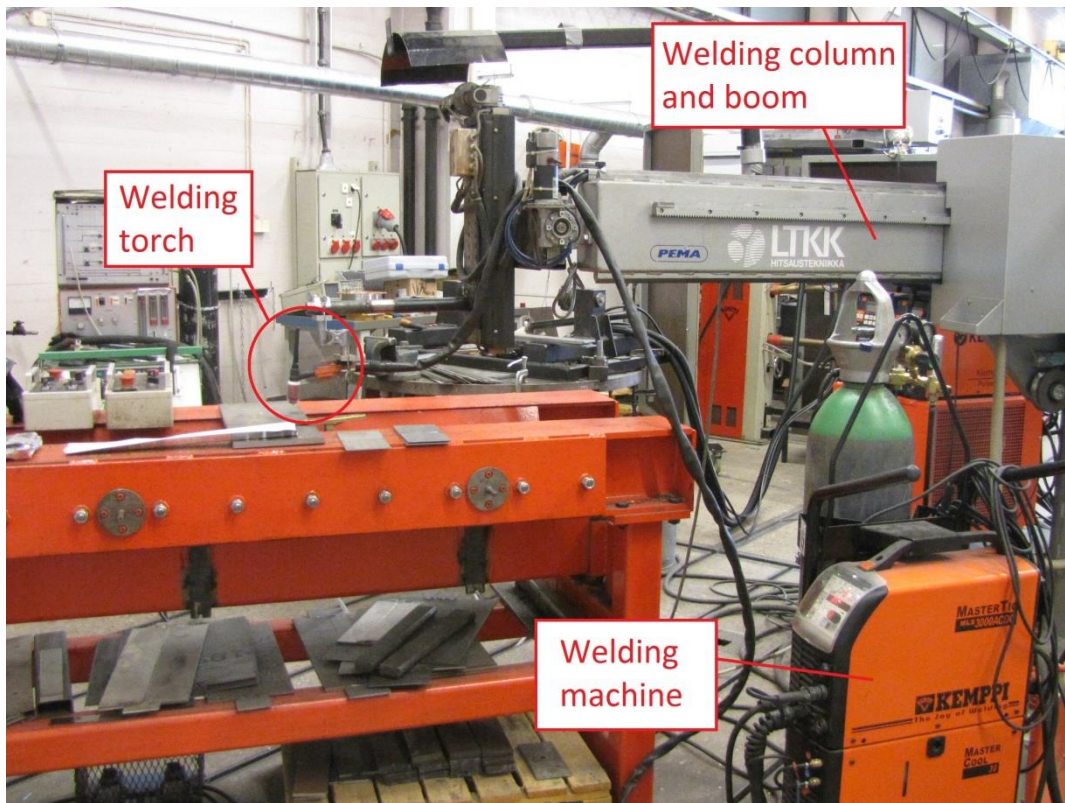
The welding setup at LUT Welding laboratory used in the study.
